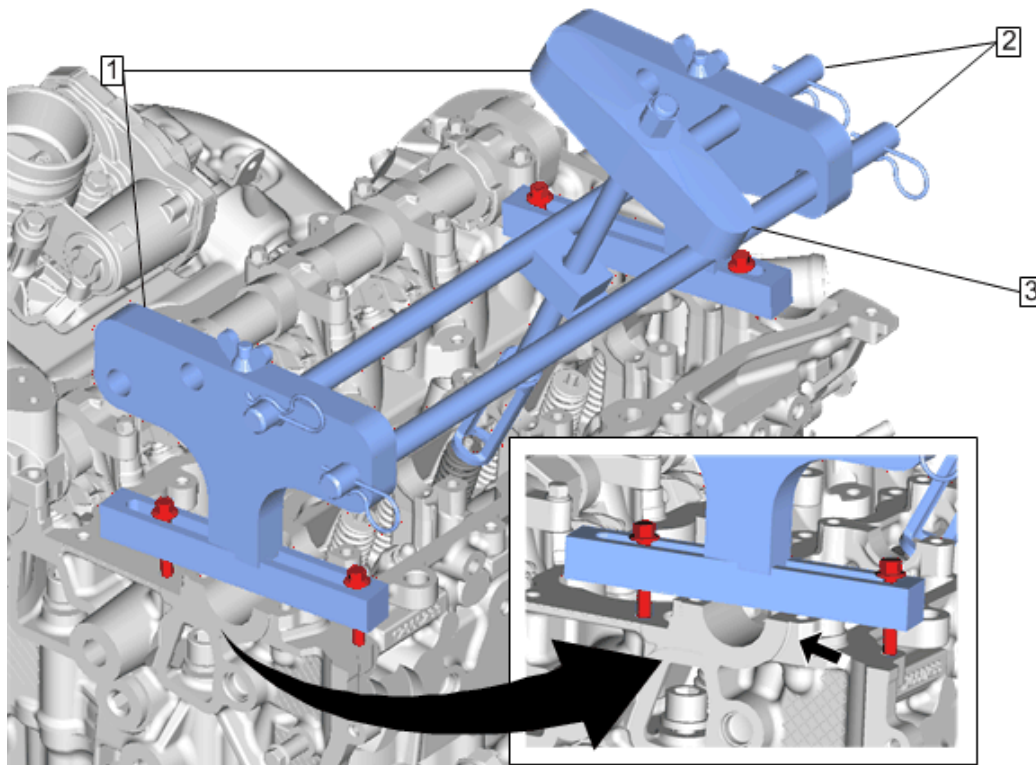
Valve Spring Compressor Kit, Cross Bars And Locks
